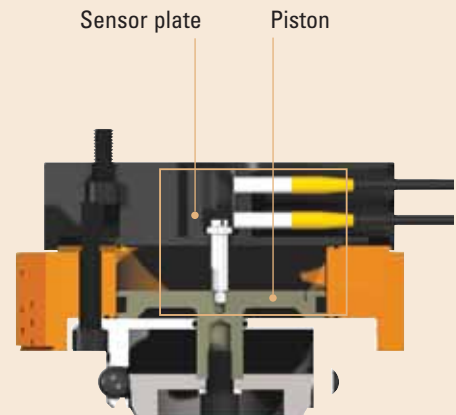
Section view of Figure 1 showing position of SIP system when locked without Tool plate. Neither the Lock nor Unlock sensors are activated. In this position, this is described as a missed Tool condition.
